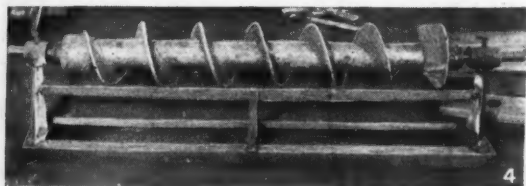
This fixture provides a constant check on the material applied when building up worn screws.
